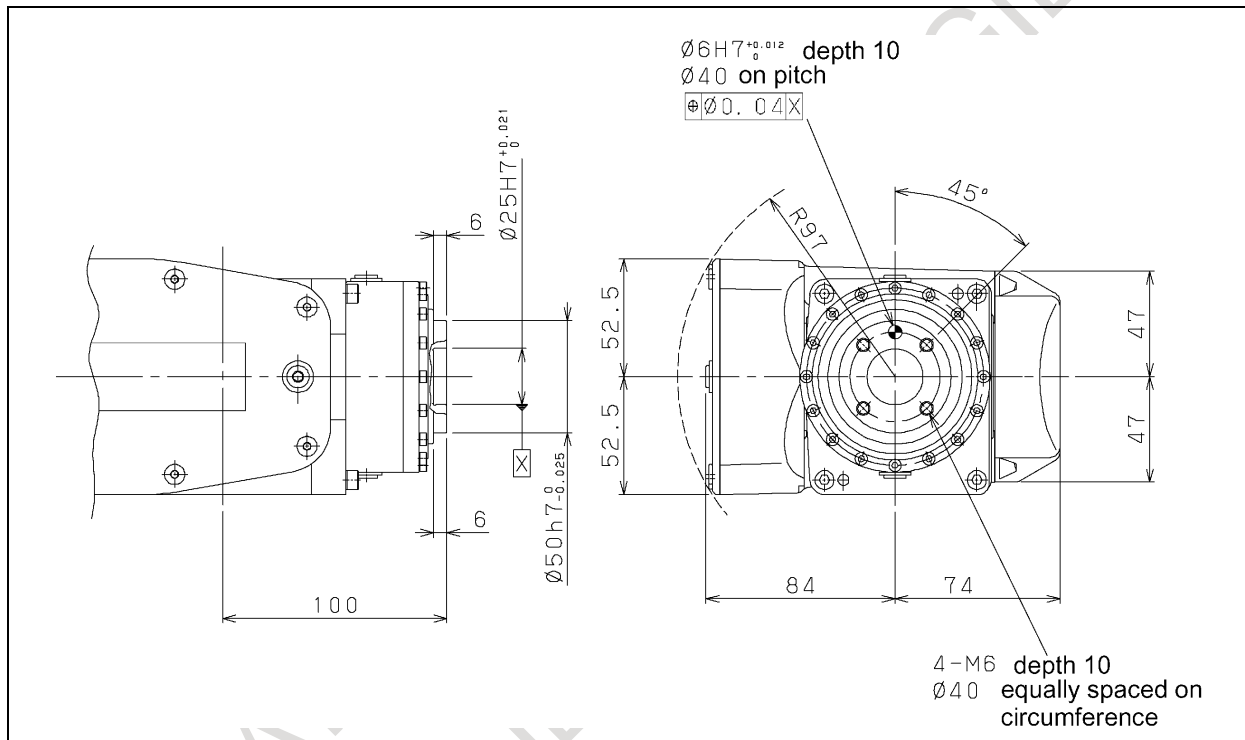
(a) Mounting face for the ISO flange type end effector
